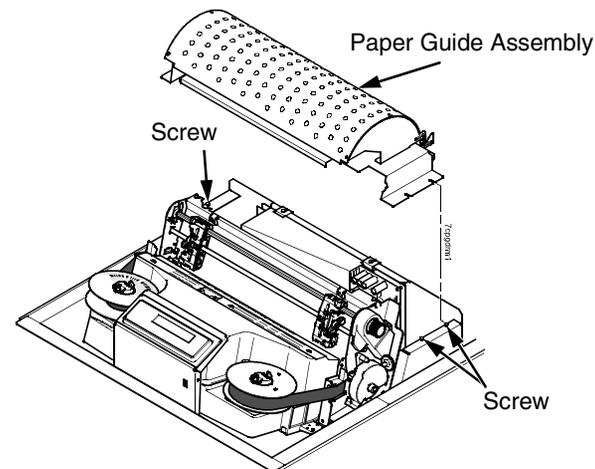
This figure shows how to remove the paper guide assembly from the card cage.
